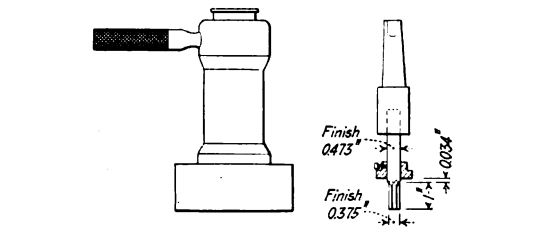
COMBINATION TOOL AND HOLDING FIXTURE
